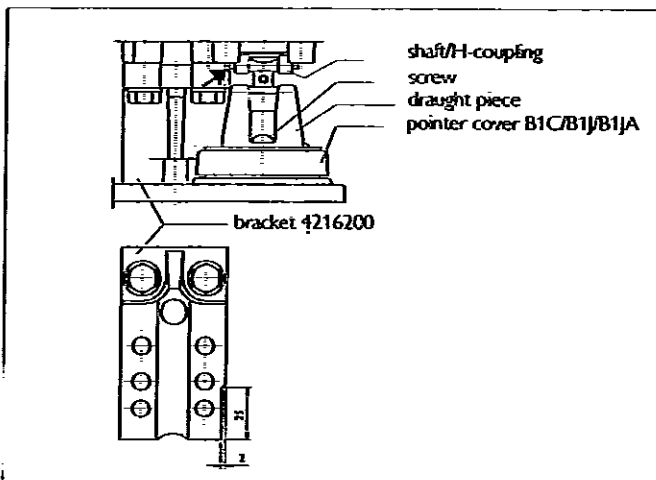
Installing NI700/S1 limit switch on B series actuator (older version).
